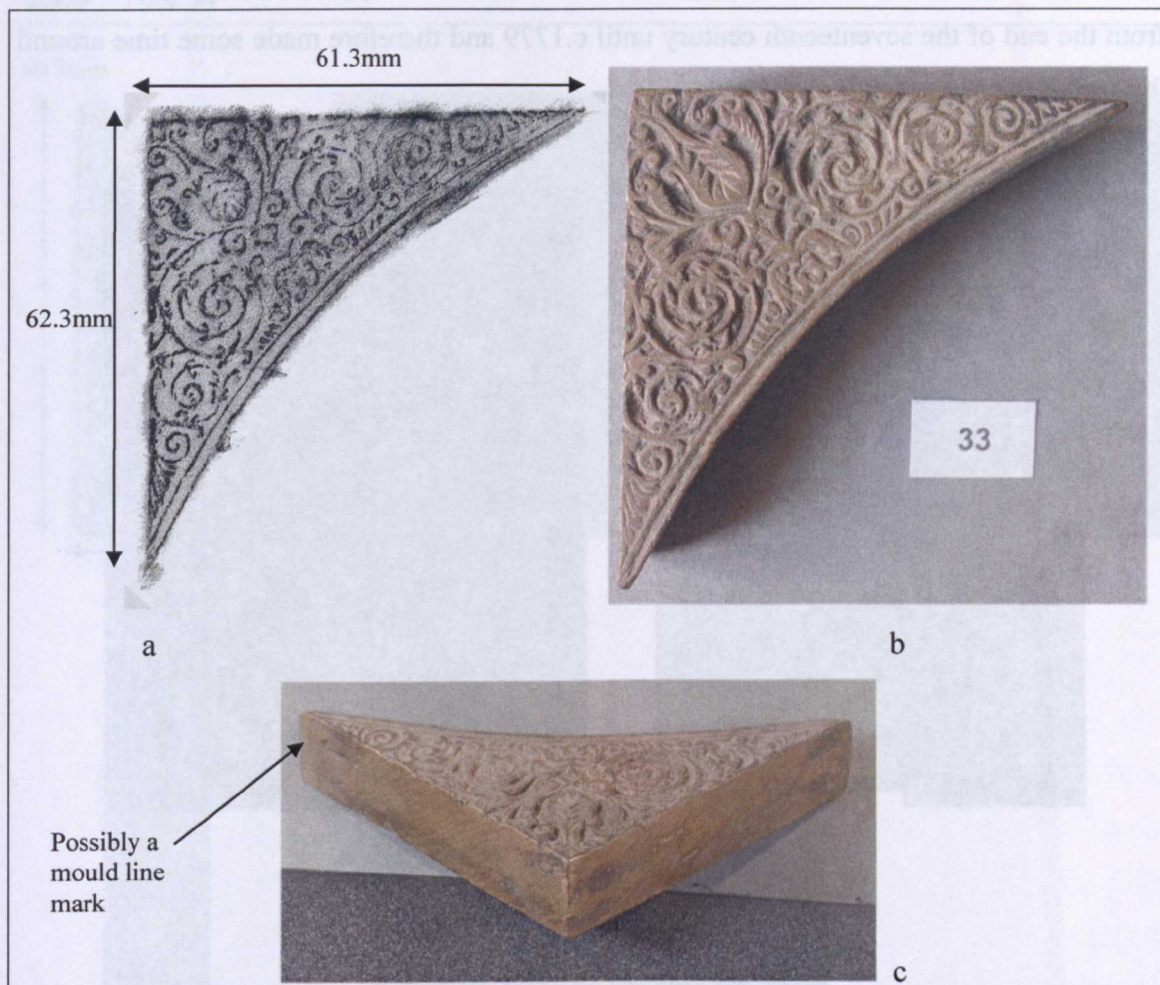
Tool 33: a) actual size rubbing, b) photograph of face, c) general view showing what could be a mould line mark
